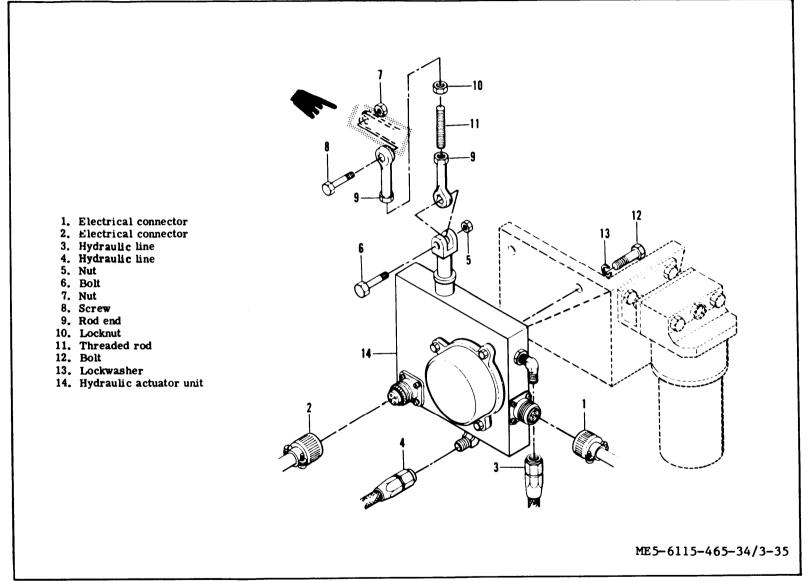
Hyderaulic Actuator Unit, Removal and Installation
